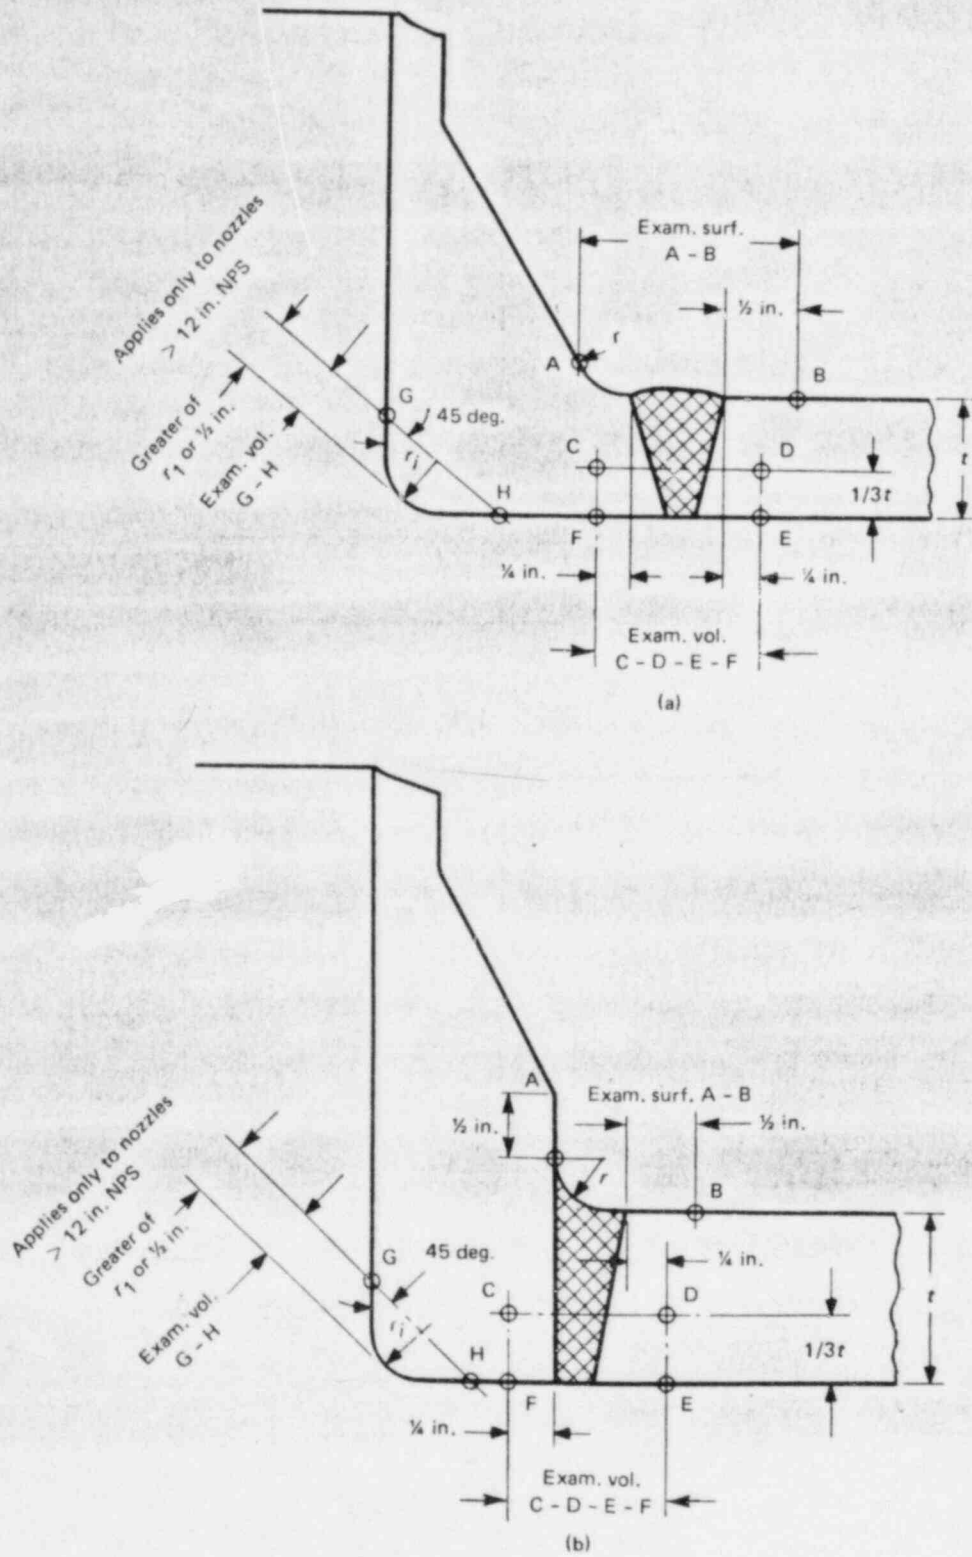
TYPICAL TUBESHEET-TO-SHELL CIRCUMFERENTIAL WELDS (Steam Generator Designs)
